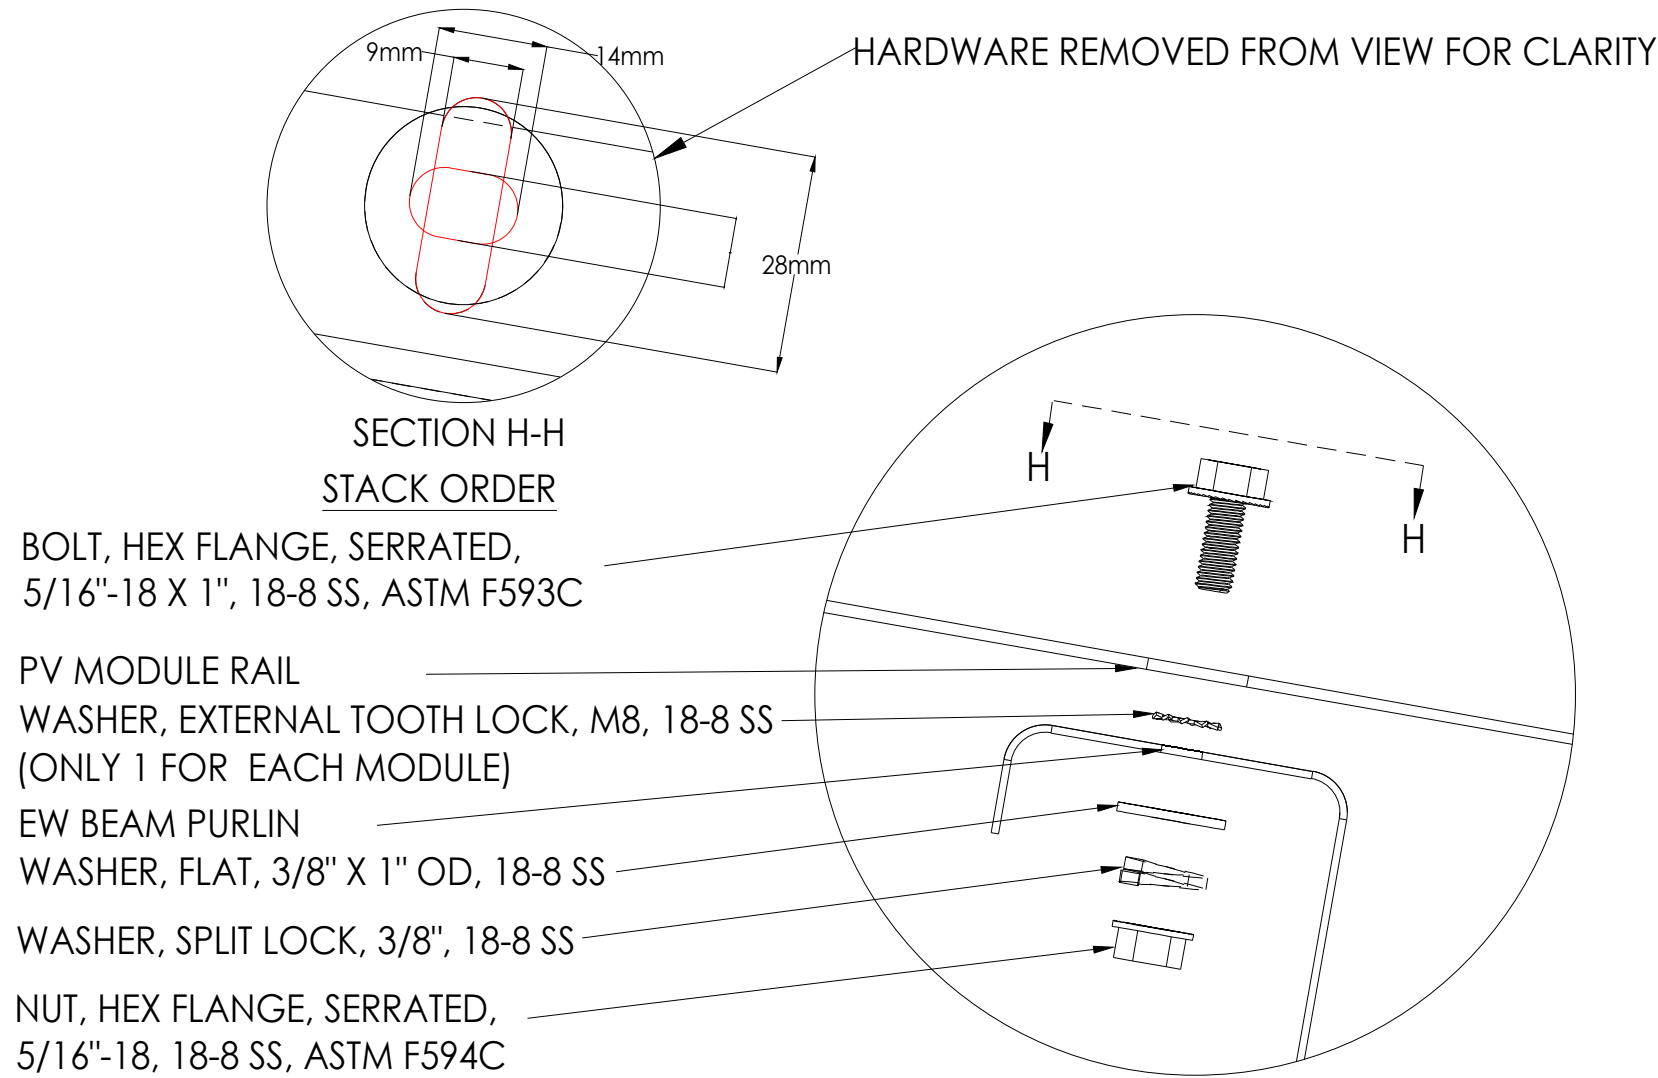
DETAIL D: EAST-WEST BRACKET TO NORTH-SOUTH AND EAST-WEST BEAM
